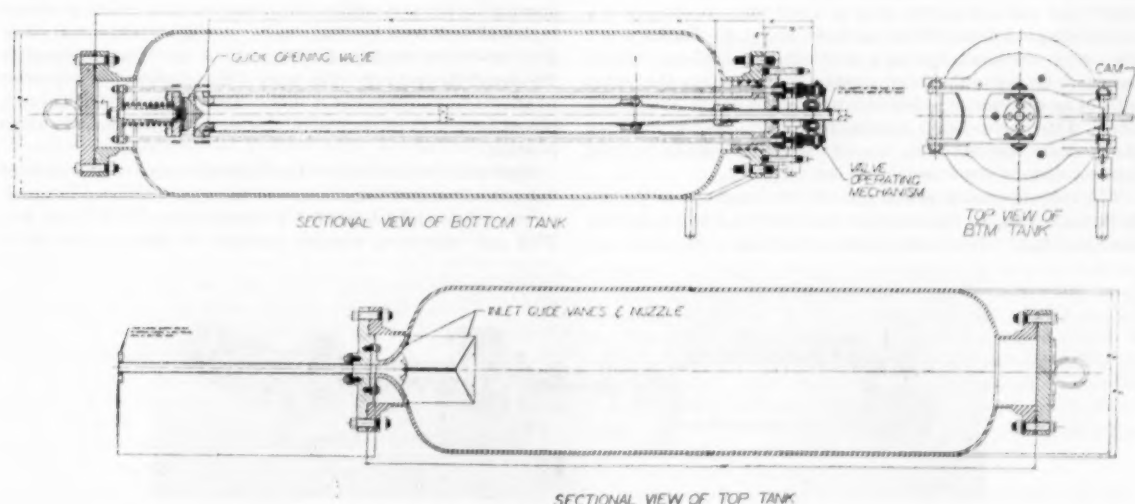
SECTIONAL DRAWING OF HYDRAULIC CIRCUIT
